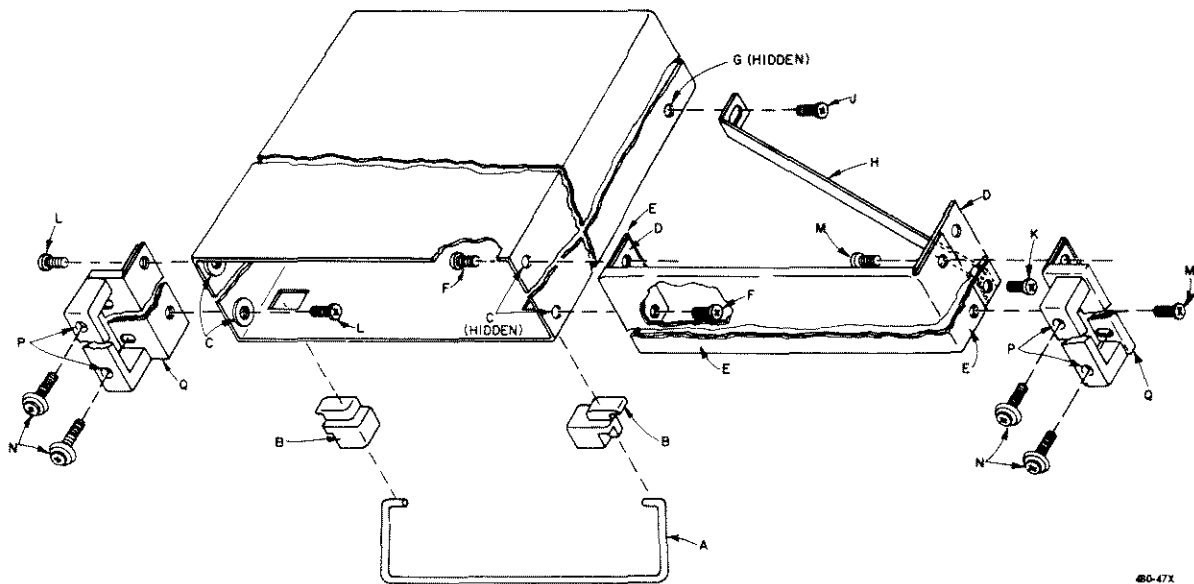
Method of mounting the counter and a blank panel in a relay rack.
